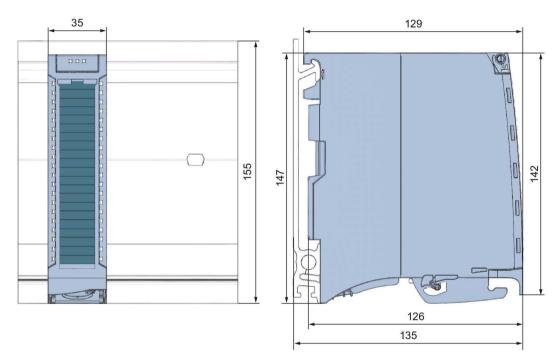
Dimension drawing of the DQ 16x24VDC/0.5A HF module
